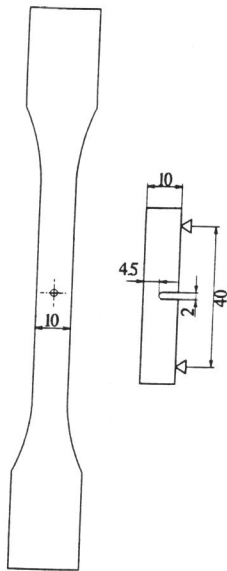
Specimens used for tensile tests and for three-point bending tests.
